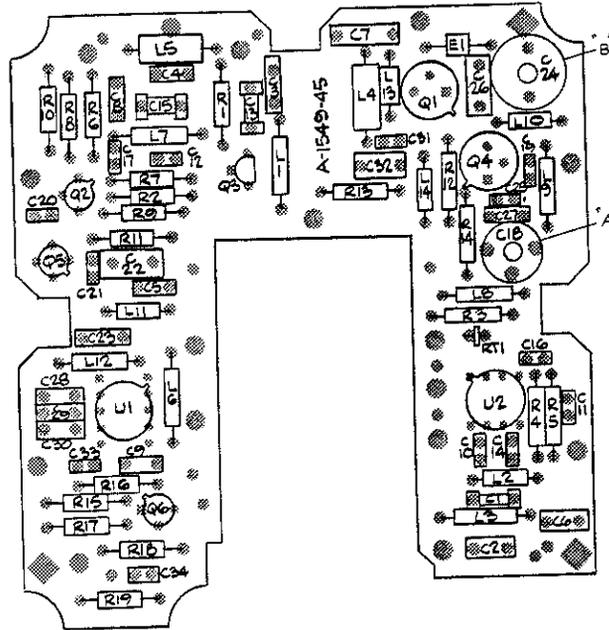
A1A15A3/4 Driver Board Assembly Parts Locations
